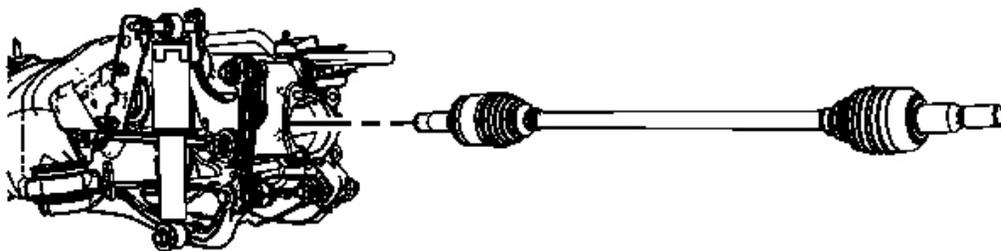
Identifying Wheel Drive Shaft Seal
